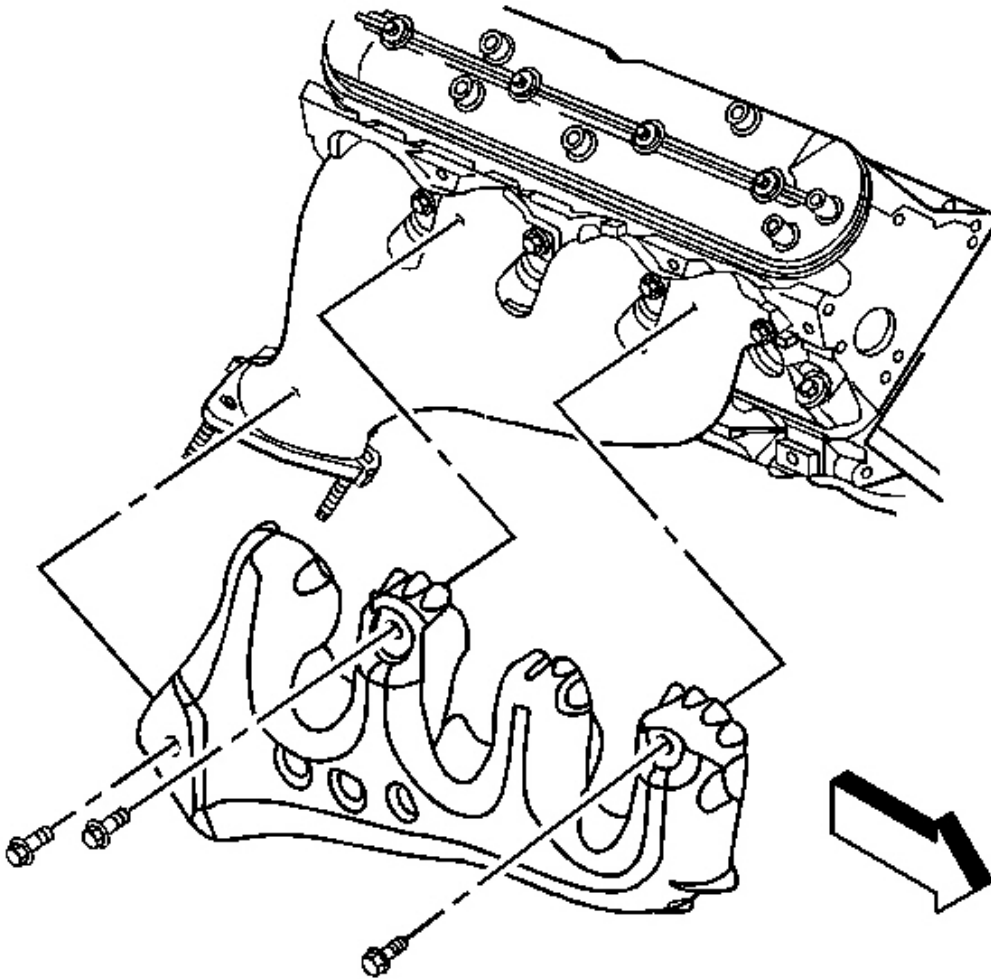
View Of Right Exhaust Manifold Heat Shield
